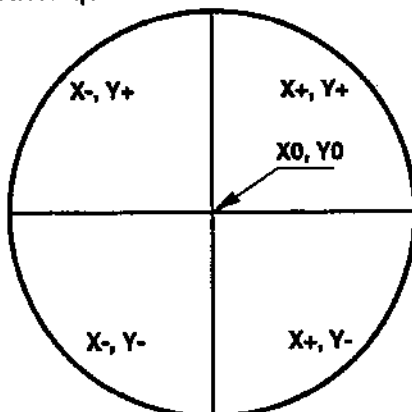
All four quadrants will have to be accessed to machine this part.
